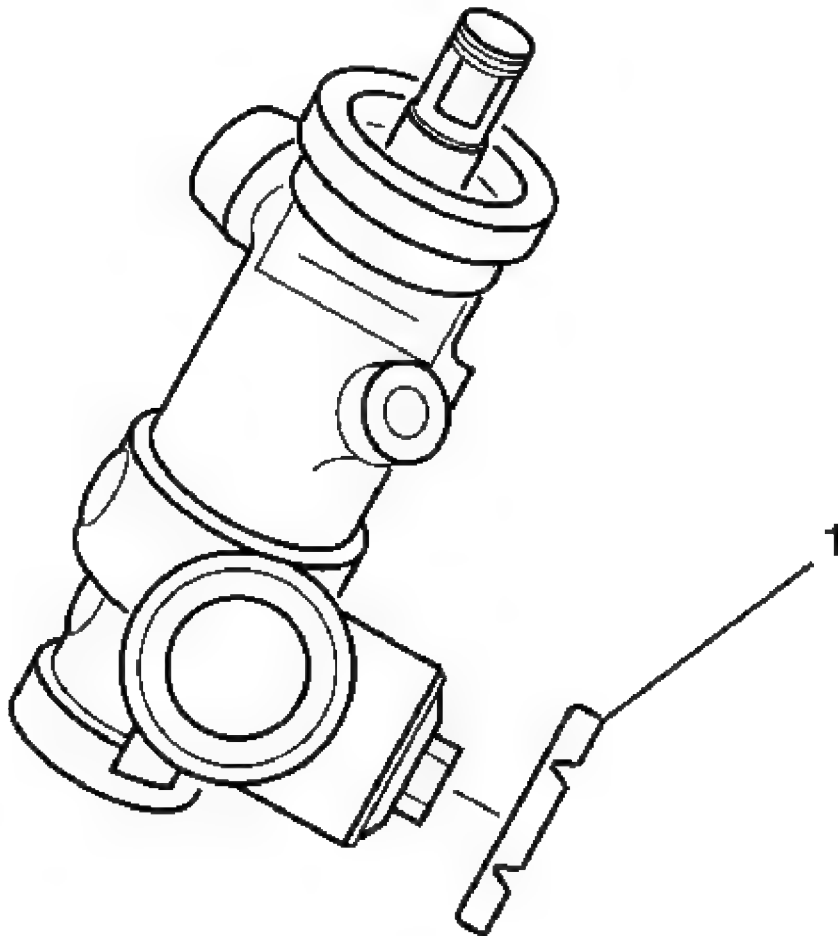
View Of Adjuster Plug Lock Nut (Rack & Pinion)
